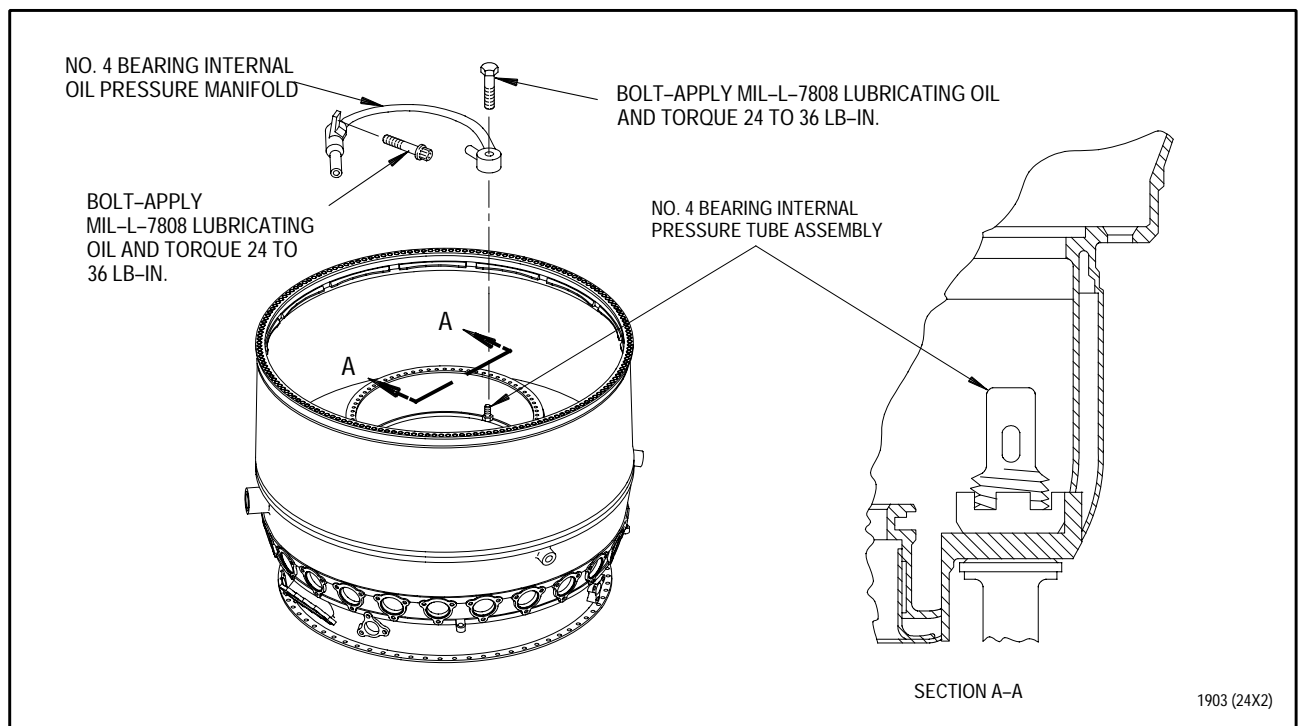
No. 4 Bearing Internal Oil Pressure Manifold - Temporary Installation
